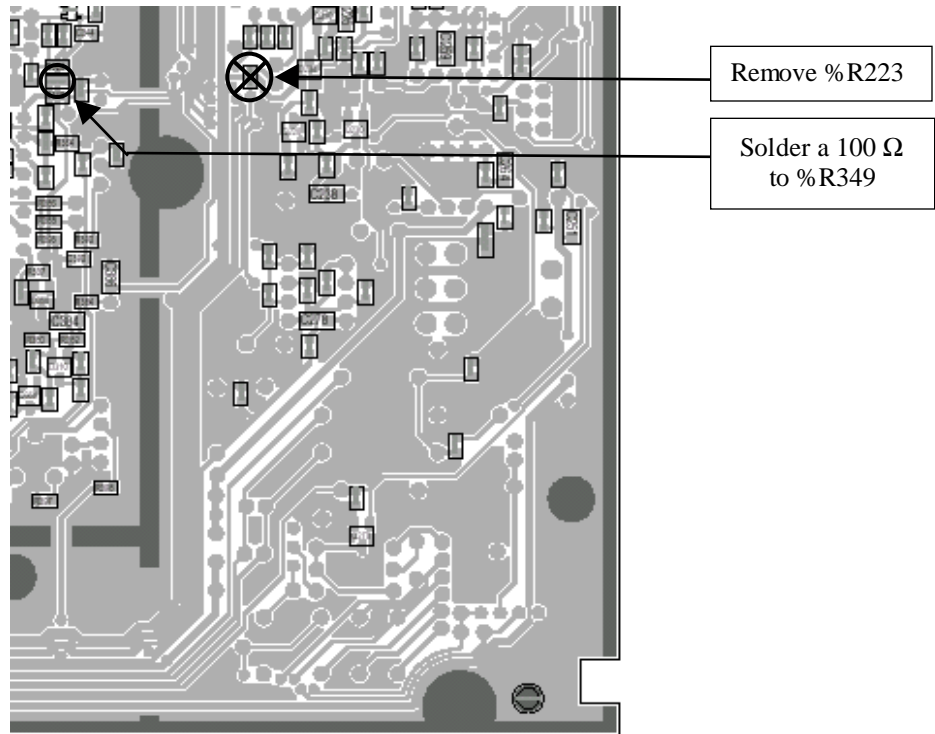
T855 receiver PCB, Bottom Side 3/4
